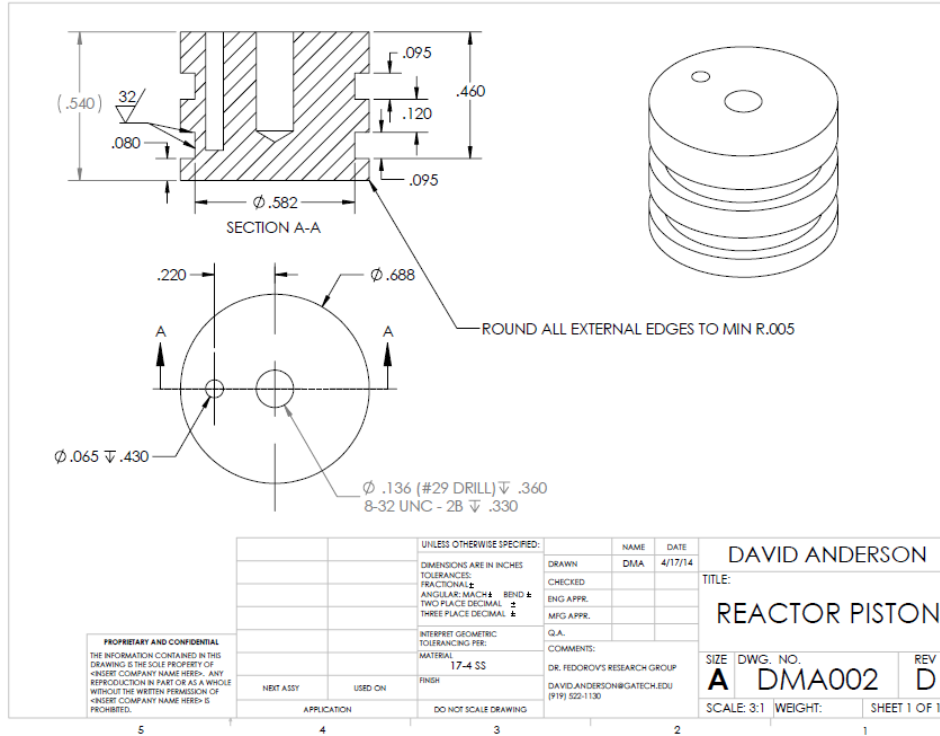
CHAMP-SORB Reactor Piston Part Drawing
